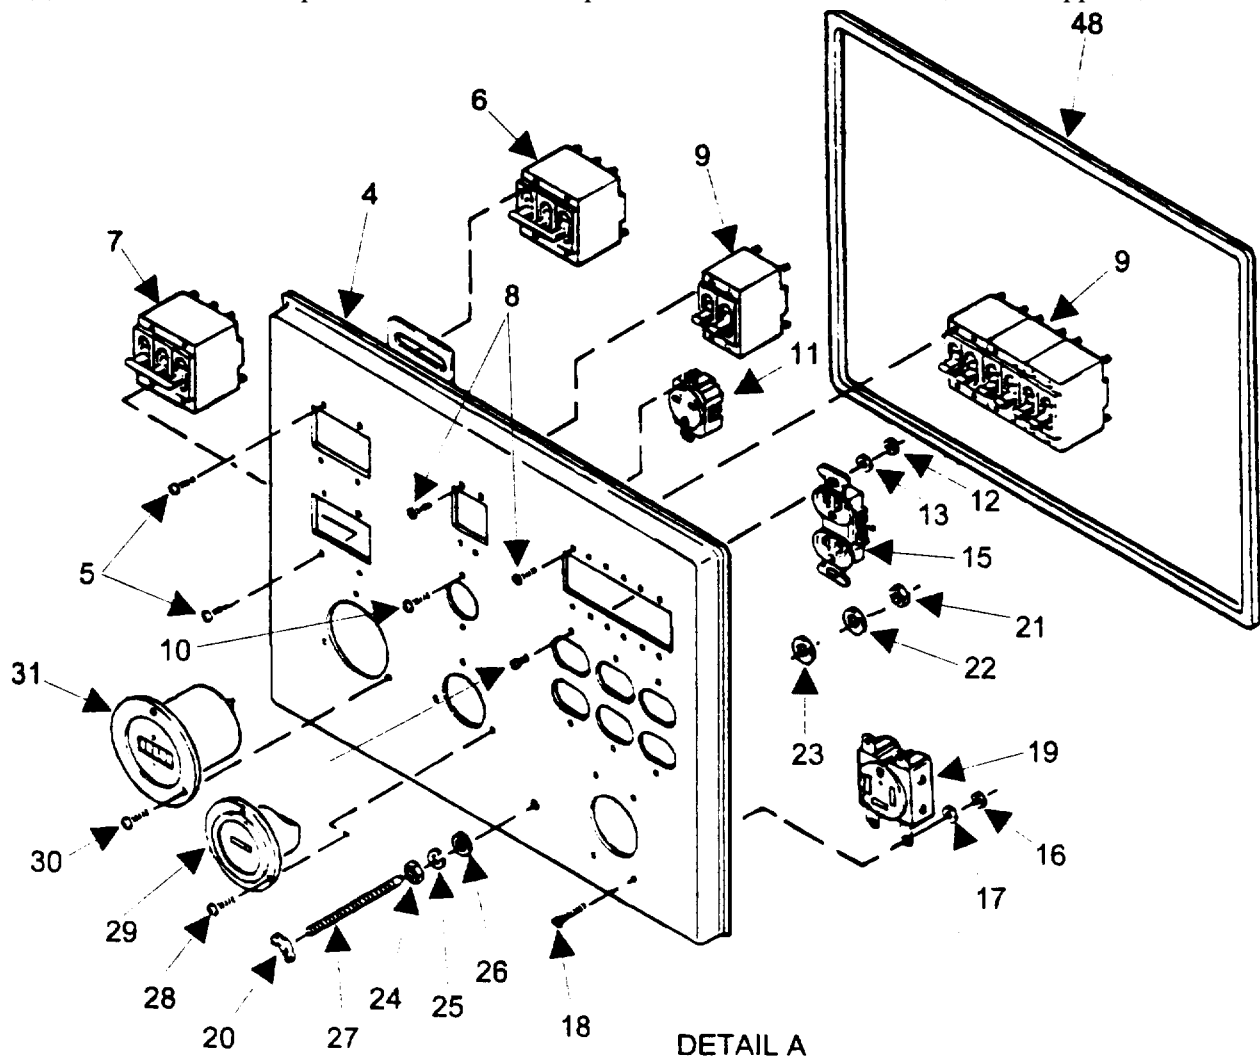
Control Panel Assembly. Disassembly/Assembly (Sheet 1 of 2).
